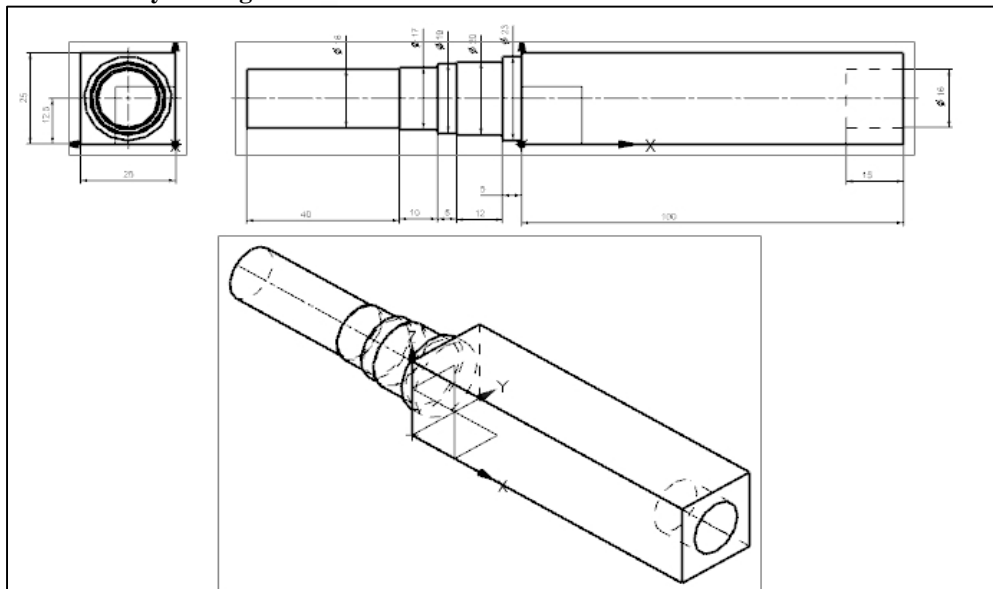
2-D Geometry of Schatz Linkage Shaft
